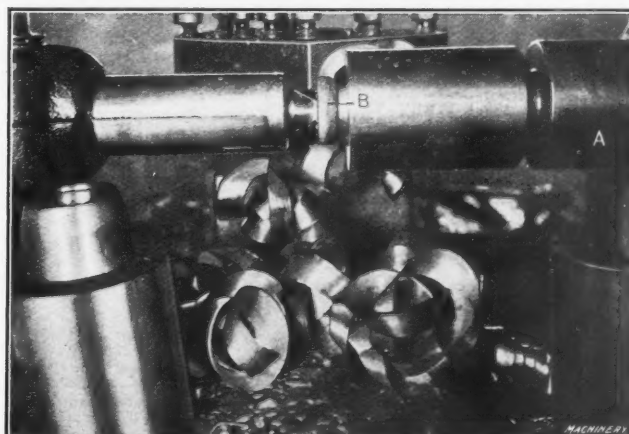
A Closer View of the Operation showing the Extreme Depth of Cut taken
